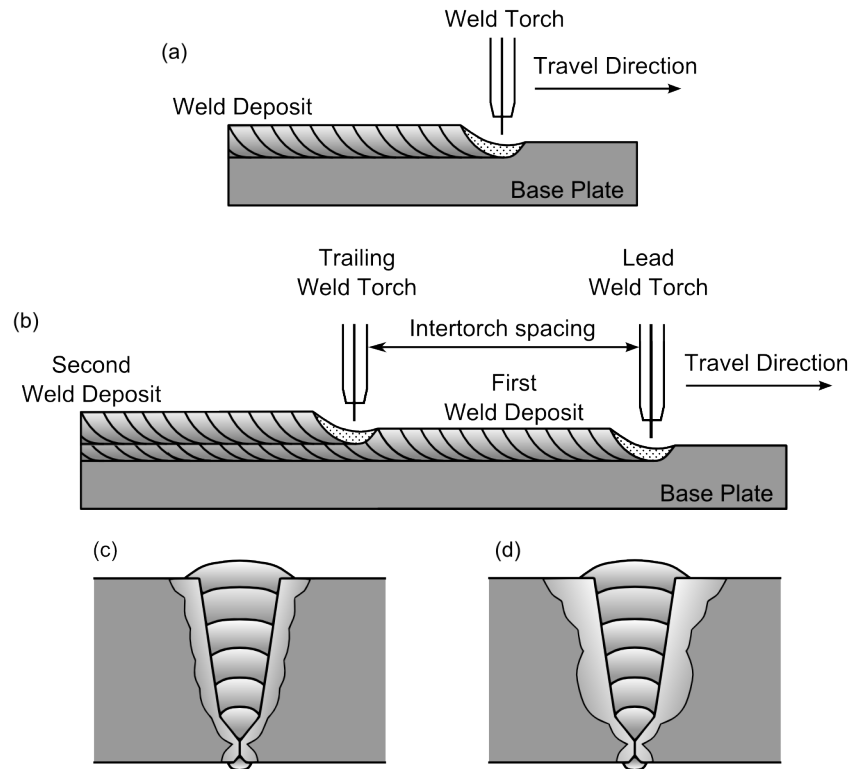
Schematics of (a) single torch welding, (b) dual torch welding, (c) the cross-section of a multipass single torch girth weld, (d) the cross-section of a multipass dual torch girth weld.
